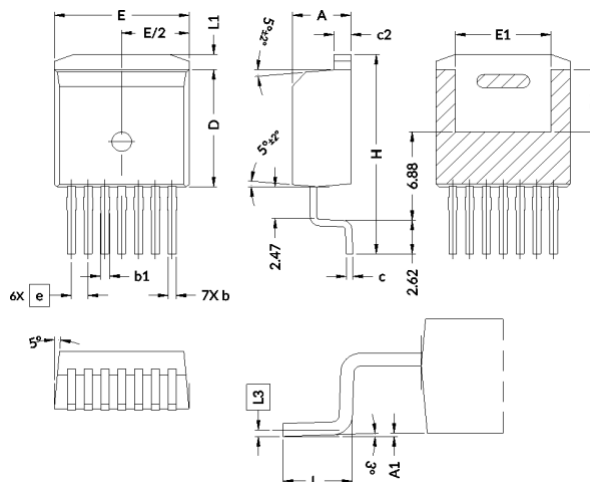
D2PAK-7L (TO-263-7L) package outline drawing.
